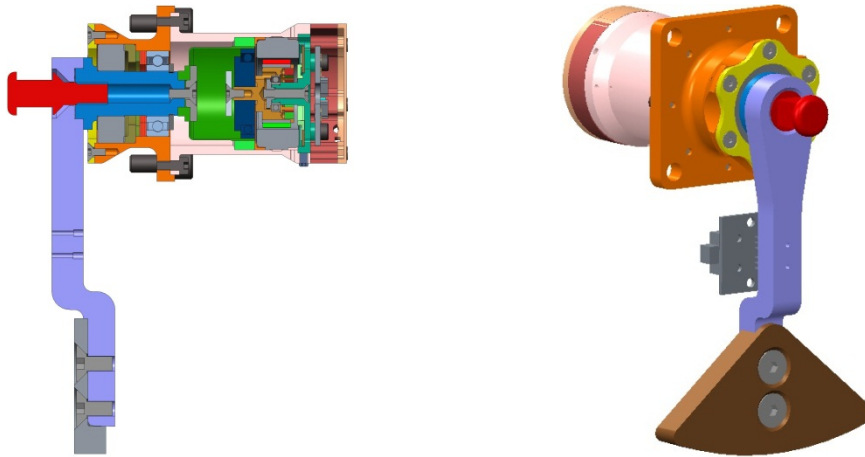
On the left: CAD sectional drawing of mobility unit (MobUnit) showing the compact fusion of Harmonic Drive gearing with brushless DC motor. On the right: CAD image of motor and eccentric arm.
